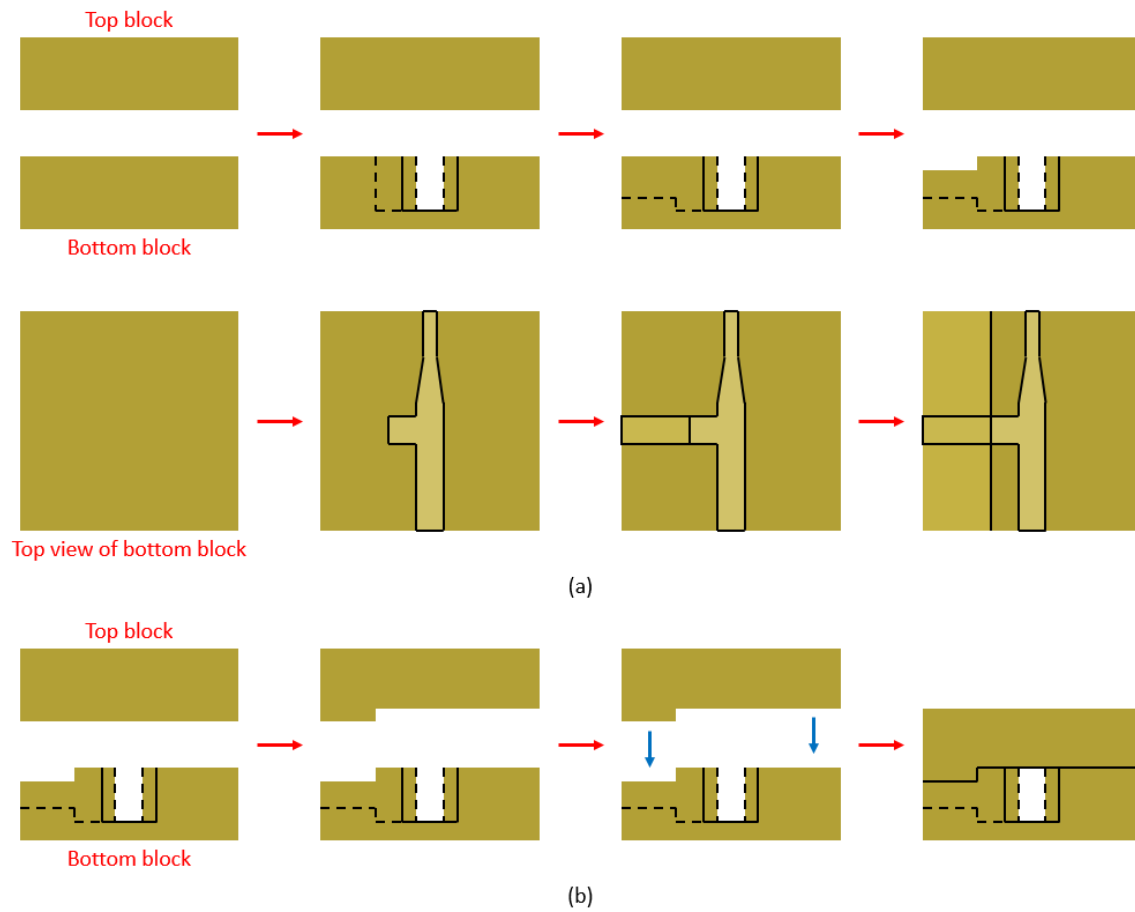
OMT fabrication procedure. (a) The bottom block is made in three milling steps. (b) The top block is made in one milling step and the two pieces are assembled together.
